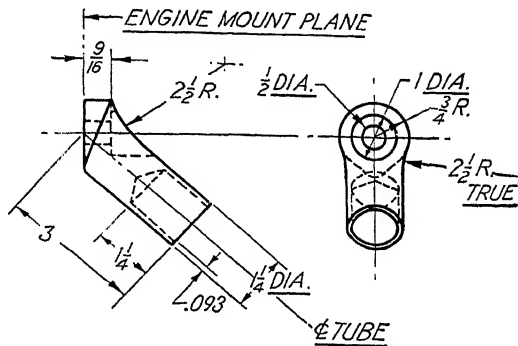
Fitting—engine mount forward upper outboard.
